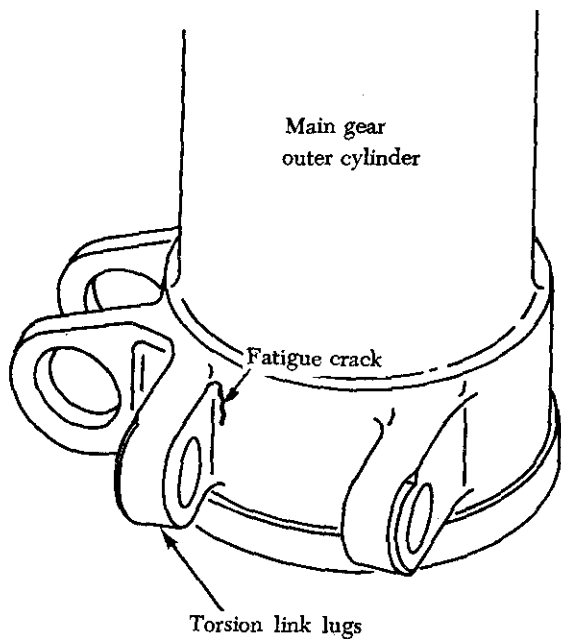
Fatigue crack in a landing gear.
